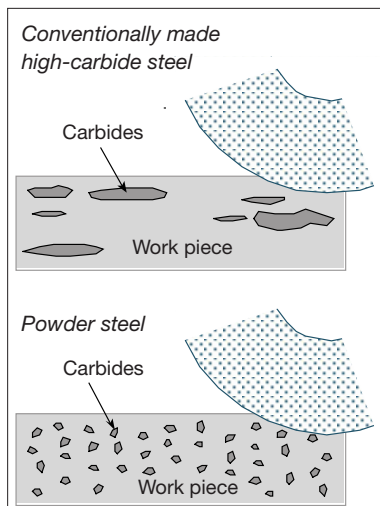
Carbide size and distribution in high-carbide tool steel (highly schematic).
